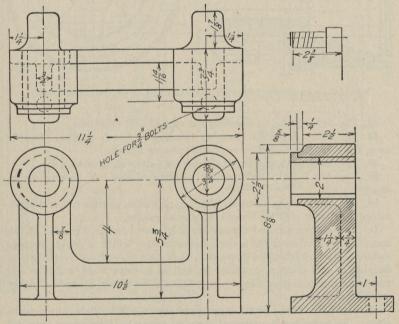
An incorrect drawing to be checked for errors (bushed bearing support).
